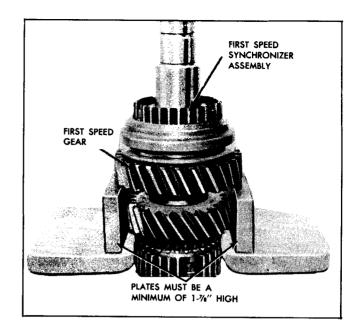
A-25 Removing 1st Speed Synchronizer and Gear
